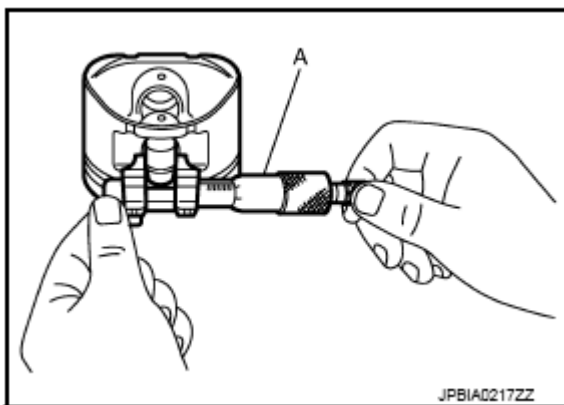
Measuring Inner Diameter Of Piston Pin Hole Using Inside Micrometer
